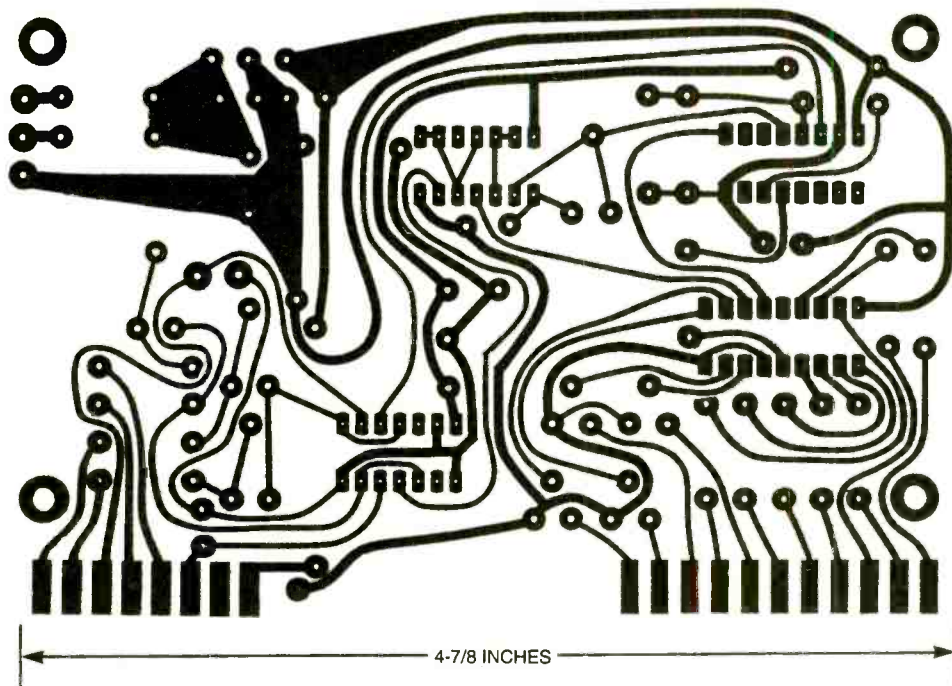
The Digital Capacitance Meter was assembled on a pair of printed-circuit boards: the main board and the display board. A template for the main printed-circuit board is shown at full size.
